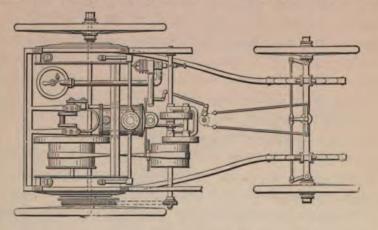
THE BERGMAN MOTOR CARRIAGE—PLAN.
